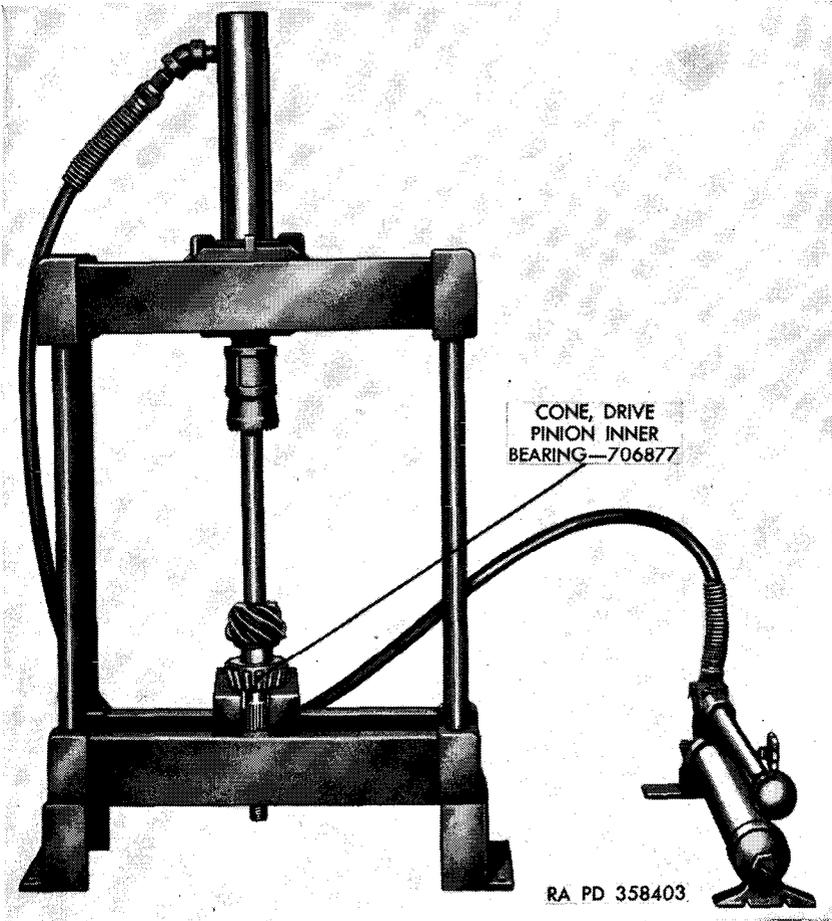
Installing drive pinion inner bearing cone on drive pinion
